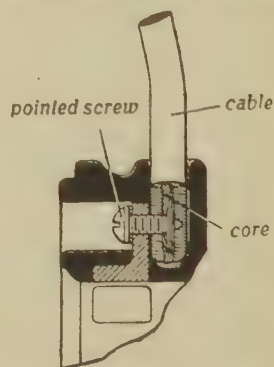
The C.A.V. H.T. Cable Attachment.
